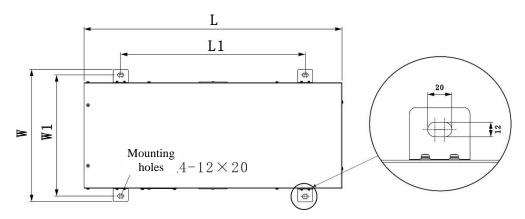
Dimensional drawing of low temperature component mounting base (unit: mm)
